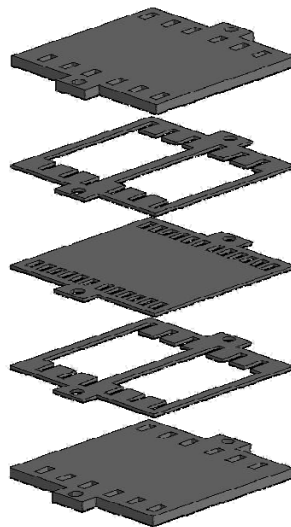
Exploded view of the stainless steel test article used used ICH and VHP processes [33]
